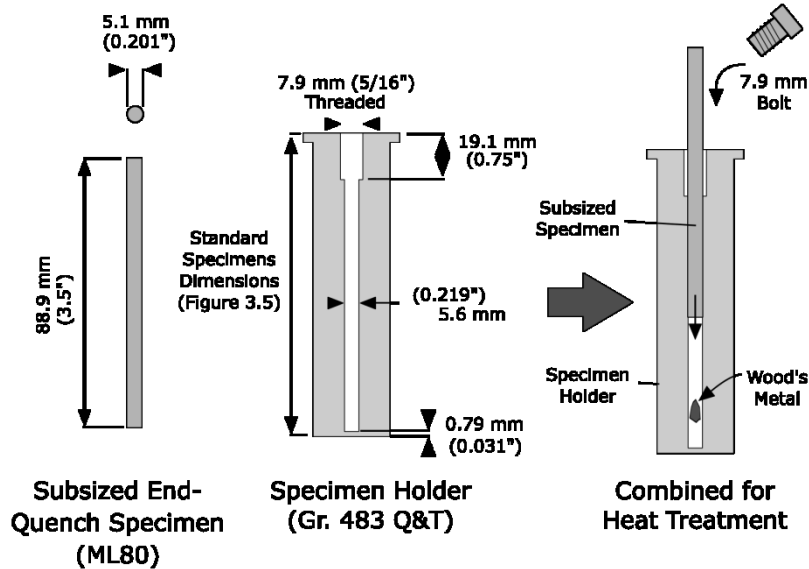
The ML80 subsized end quench specimen (left) and specimen holder (center) dimensions. The subsized specimen was placed inside the specimen holder (right) for heat treatment.
